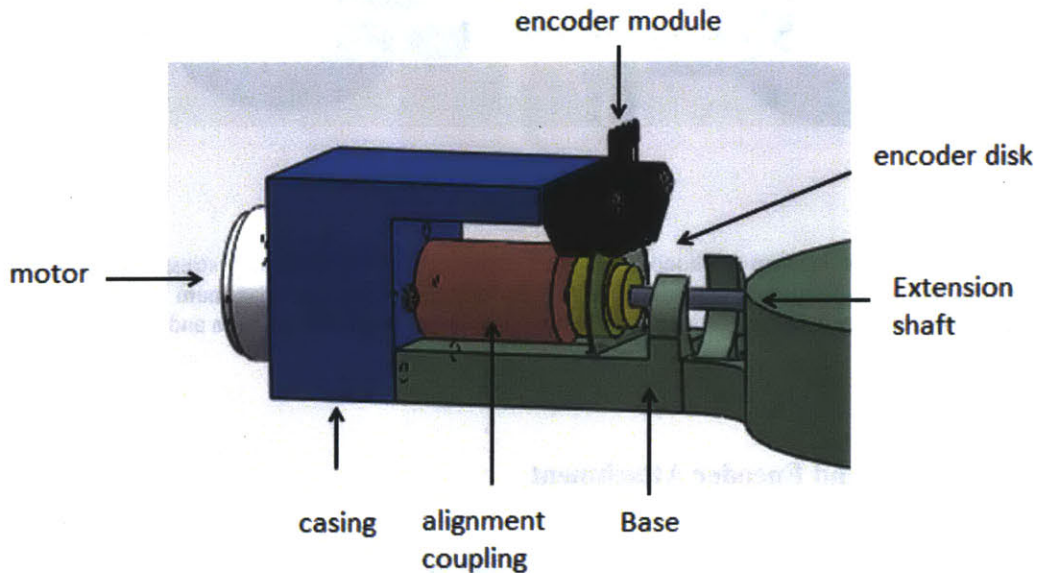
The assembly and attachment of electronic components on the base. The motor attaches to a removable casing and the shaft is extended with a flexible coupling. Encoder module is subsequently mounted on the extension shaft, with the other end of the shaft connect to the hoop or the driving pulley.
